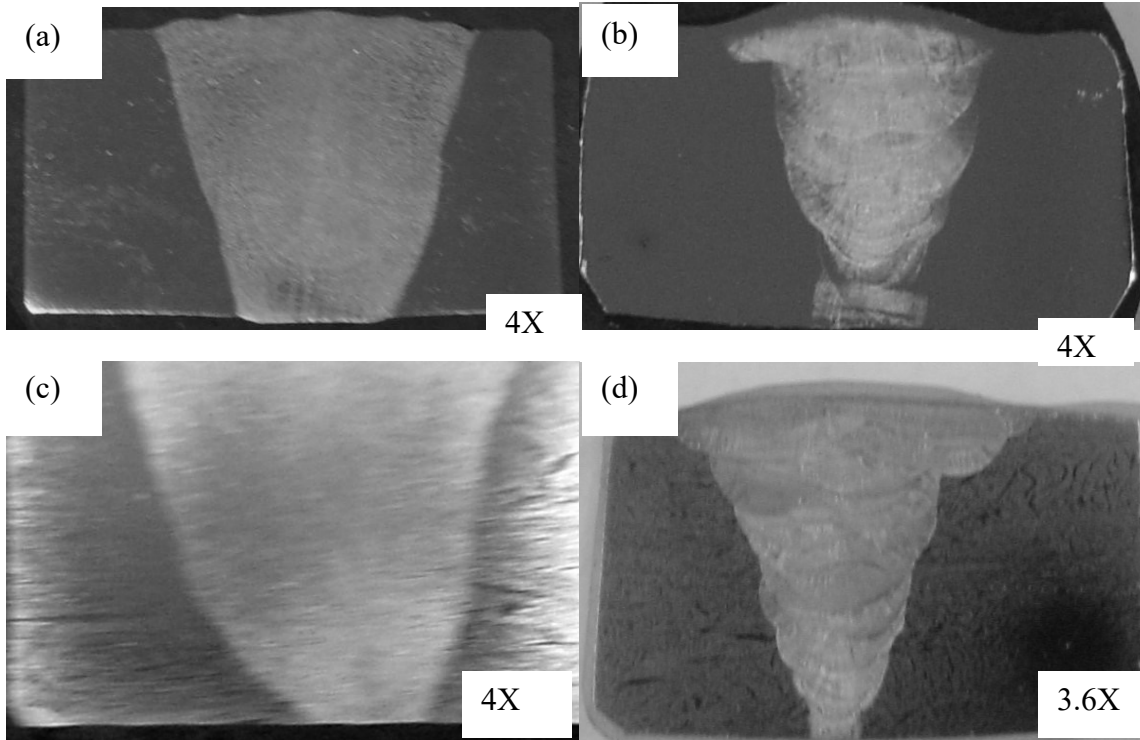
Cross-sections of the weld joints produced by (a) A-TIG welding (b) Multi-pass TIG welding on 10 mm thick type 304 LN stainless steel (c) A-TIG welding (d) Multipass welding on 12 mm thick type 316 LN stainless steel respectively
